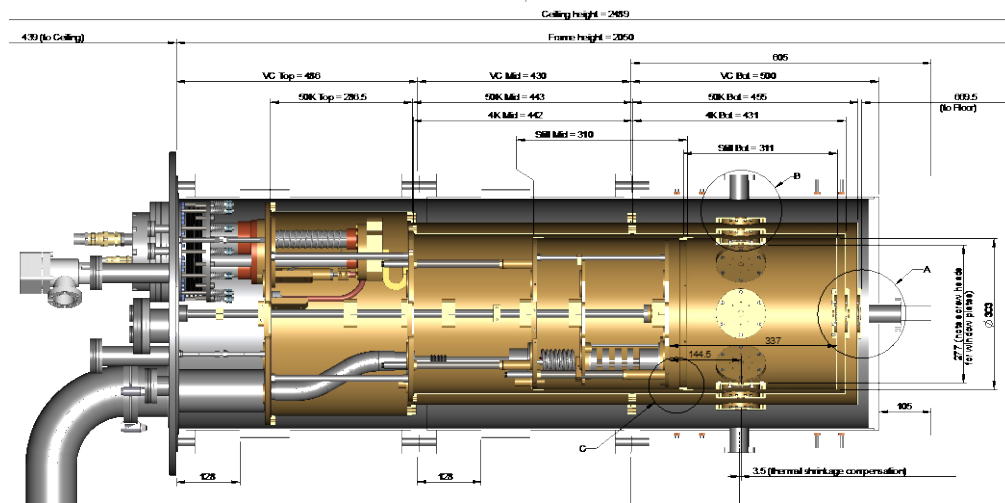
Highlight of the drawing showing the design of the milli-Kelvin dilution refrigerator cryostat, to be installed in the IO QIS lab (manufacturer: Bluefors). The cold plate and science section are to the right in the drawing, and the nine optical access ports and their windows can be seen. (When installed, the cryostat will be suspended with the cylinder long axis vertical, and with the science section at the bottom). We anticipate having the dilution refrigerator delivered in June 2022 and assembled soon thereafter.
